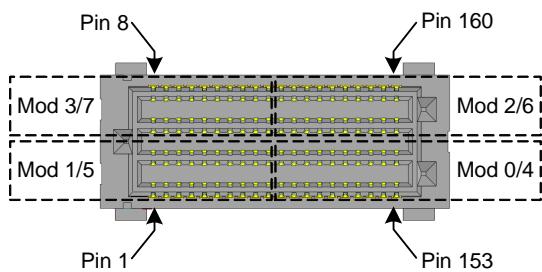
160-Pin EXC-8000CON Mating Connector – Front View
